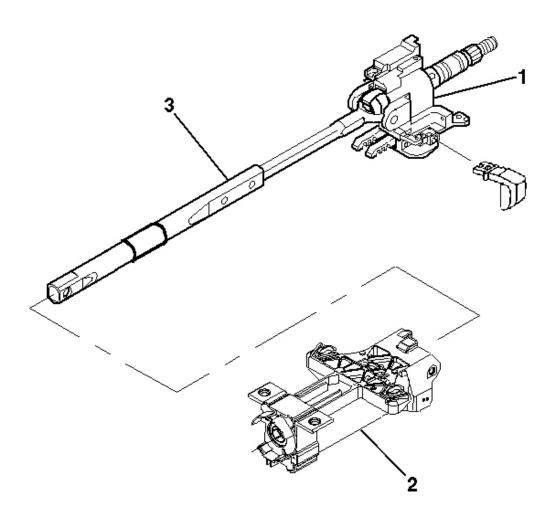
View Of Upper Steering Column Components Courtesy of GENERAL MOTORS CORP.
